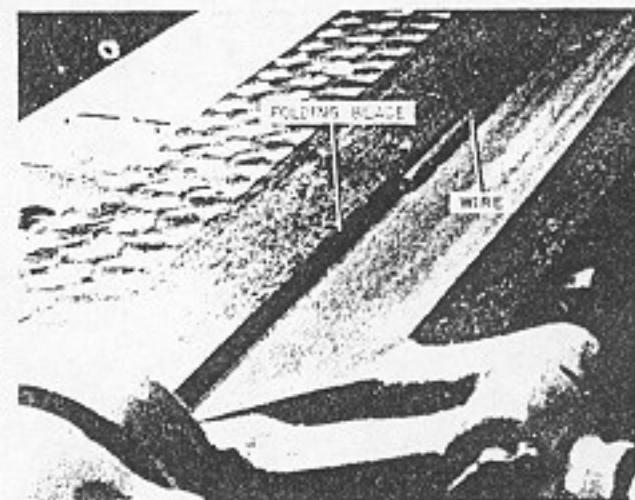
Hold the metal securely in the bar folder until the wing has been raised to grip the metal.
